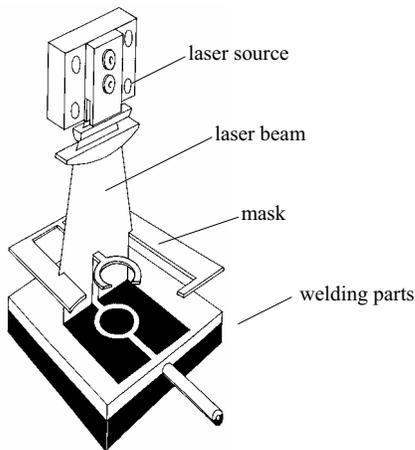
Mask welding. A line focused laser beam is scanned over a mask, which discriminates the energy to the desired weld area.
